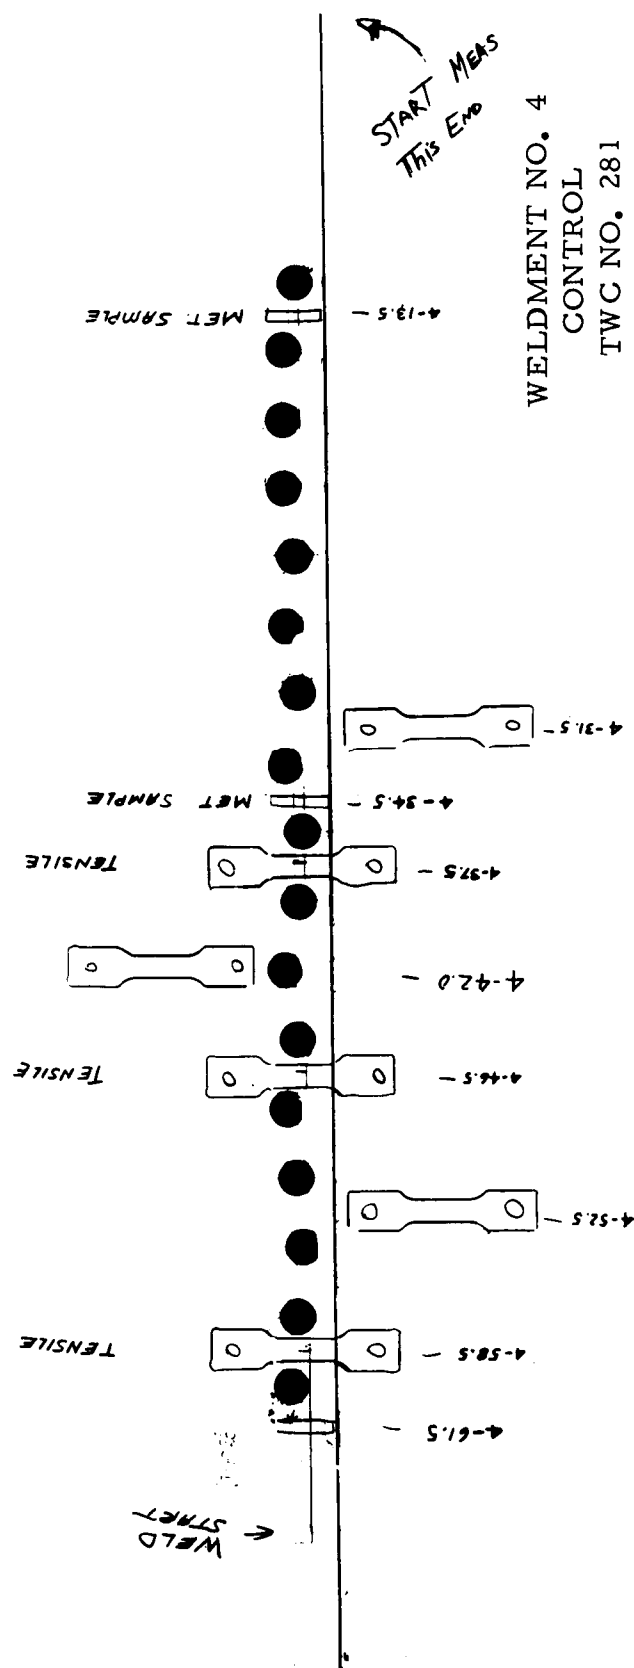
Location of Tensile and Metallographic Samples for Control Weldment No. 4 (Not Strained Before Welding)
